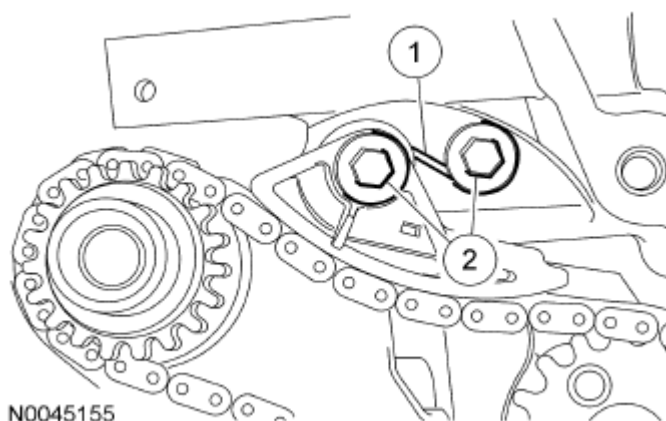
Locating Oil Pump Drive Chain Tensioner Shoulder Bolts
